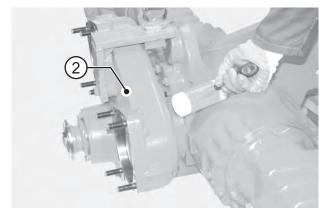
DIRECTLY FLANGED VERSION ONLY Loosen the reduction unit using a plastic hammer.
